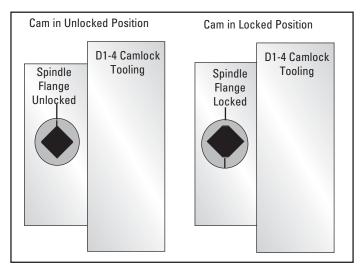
D1-4 Lathe Spindle in Locked & Unlocked Positon
